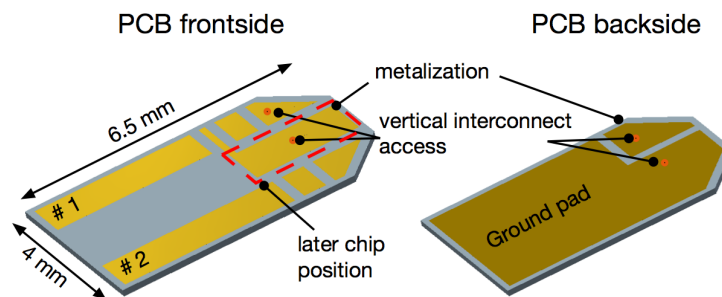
PCB for the electrical and mechanical packaging of the silicon probe chip. The PCB is $\approx 400 \mu\text{m}$ thick and has a structured $\approx 17 \mu\text{m}$ thick Au coating on both sides, for contact pads and ground pad. The front- and backside coating is connected with two vertical interconnections. The vertical interconnection in the center is used to connect the cantilever chip to the ground pad on the backside (orange dots). The label # 1 and # 2 highlight the two pads, which are contacted by the copper spring of the cantilever holder, described in the next subsection, to create a mechanical and electrical contact between the PCB and the cantilever holder. The red dashed line marks the area of the later probe chip position.
